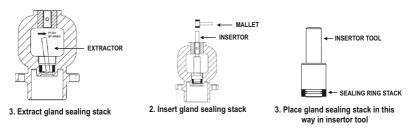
View showing extractor tool & insertor tool for gland sealing stack of piston valve of size DN65 - 200
